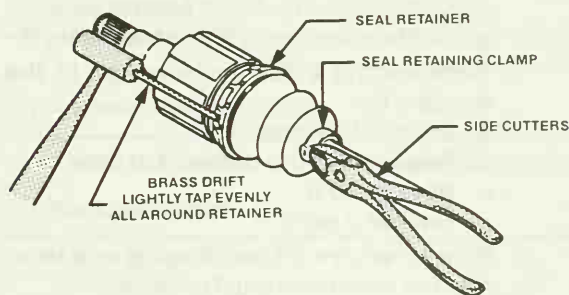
Removing the clamp and retainer. (Chevrolet Motor Division of General Motors Corporation)
